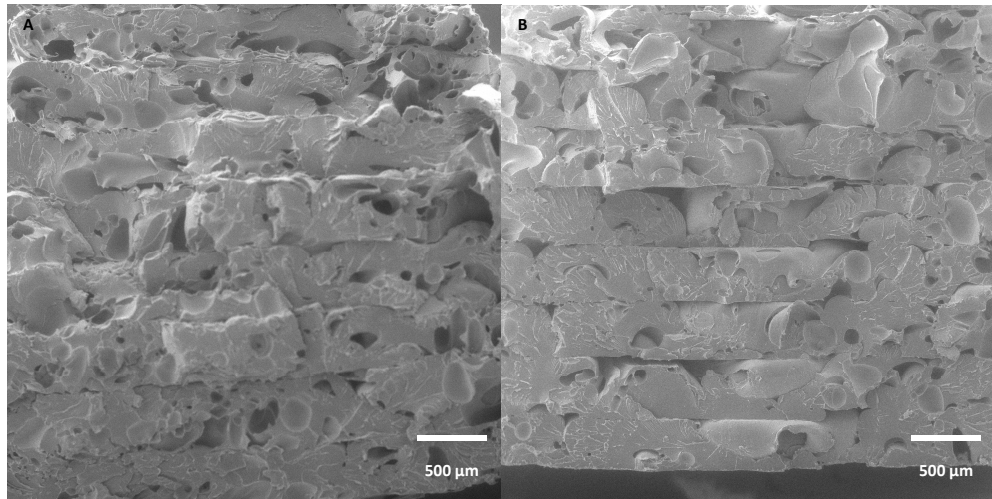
SEM images of the fracture surfaces of ULTEM 1010 A) H-90° and B) H-0° specimens manufactured under low pressure
